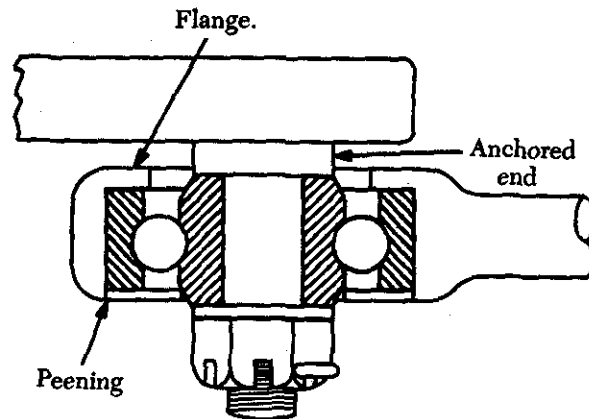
Rod end flange interposed between the bearing race and the end of the attaching bolt.
